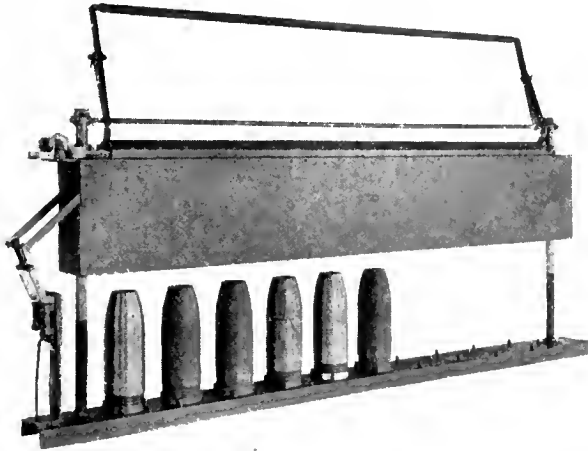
ELECTRIC SHELL BAKING UNIT WITH HOOD RAISED AND SWITCH OPEN.
